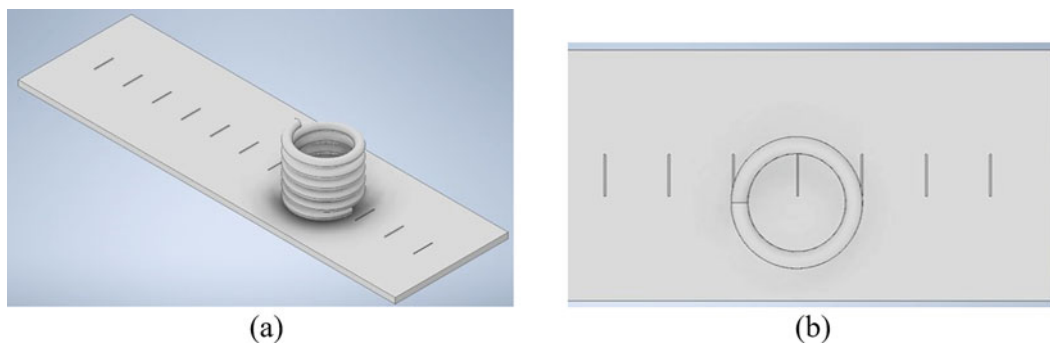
A scheme of the relative position between the coil and the inspected specimen surface, (a) lateral and (b) top view
